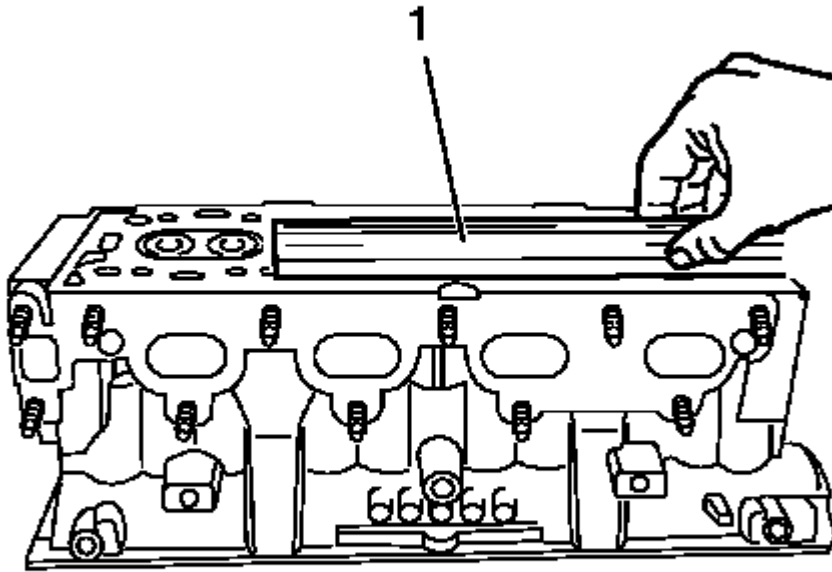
Using Straightedge To Inspect Cylinder Head Sealing Surface For Flatness
